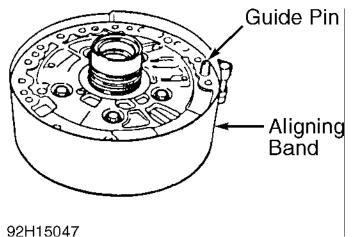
Assembling Oil Pump Housing & Reaction Shaft Support Courtesy of Mitsubishi Motor Sales of America.
